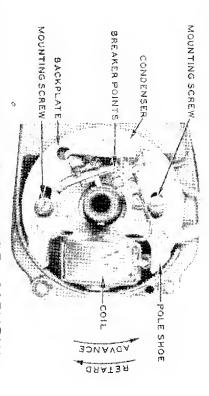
MAGNETO BACKPLATE ASSEMBLY
